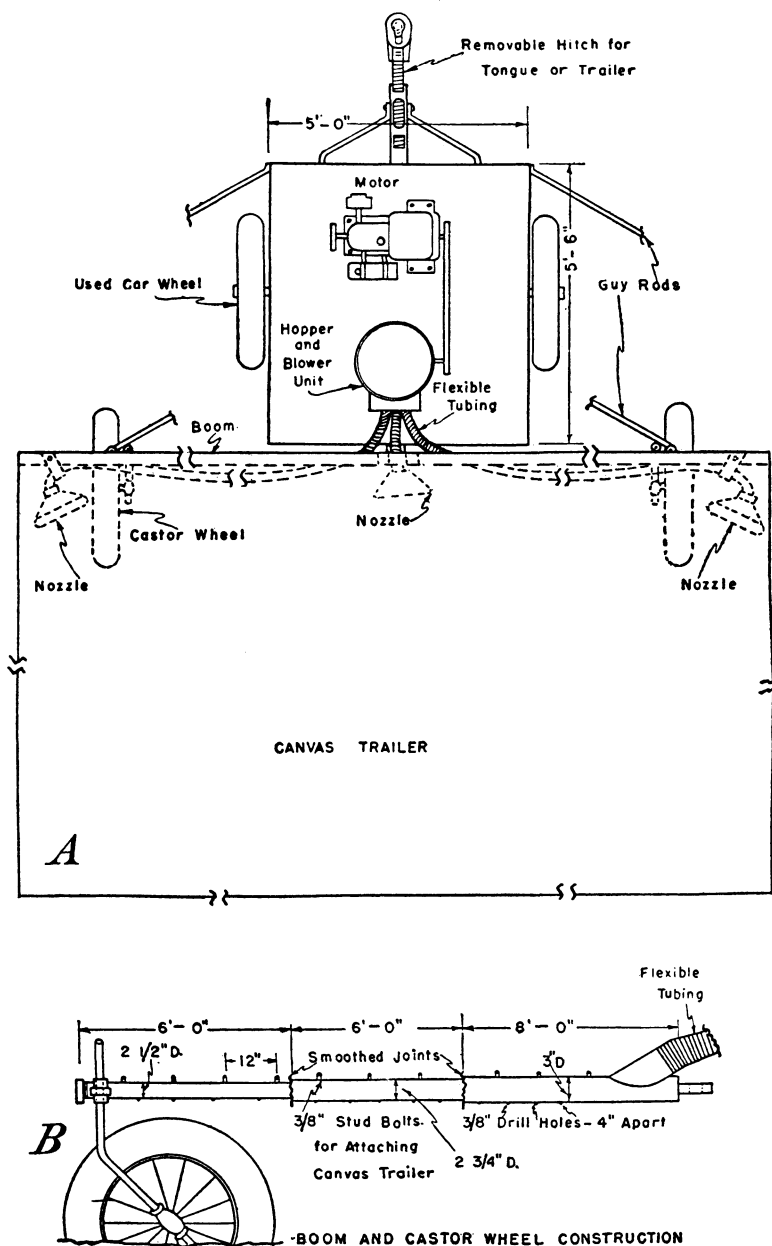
A, Diagram of duster, showing nozzle-type boom; B, detailed section of perforated-type boom.
